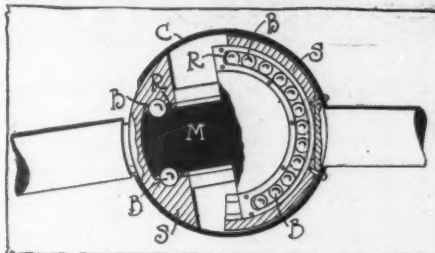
BALL-BEARING UNIVERSAL JOINT
